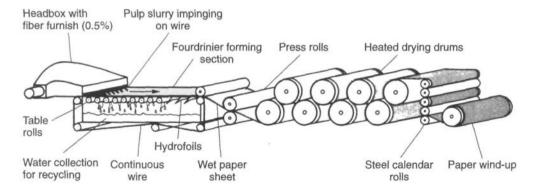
Schematic of a modern Fourdrinier paper machine.
